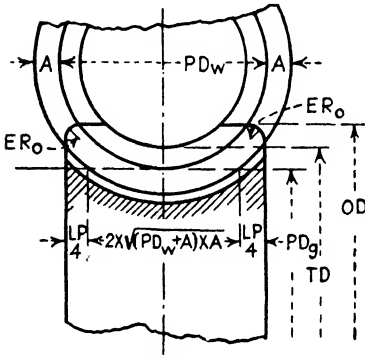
Diagram worm and gear with 29-deg. thread.
